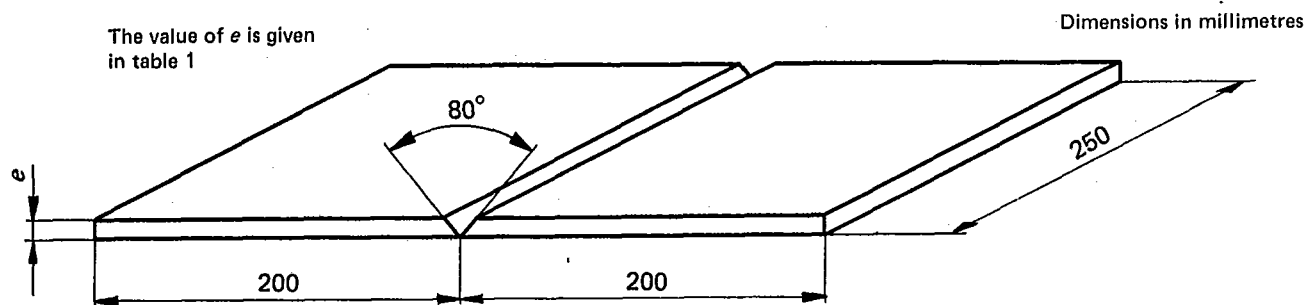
Preparation of assembly for braze-welding (steel)
